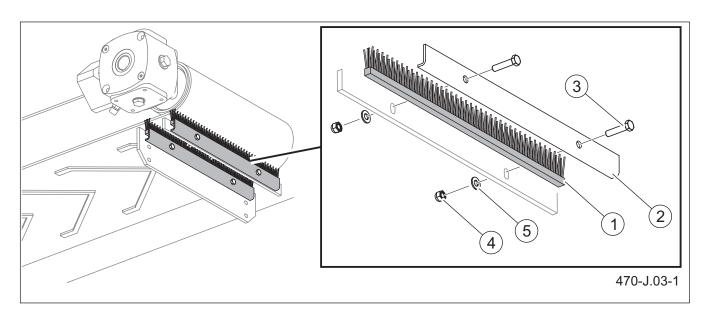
Replacement of conveyor belt brushes (1) brush (2) clamping strip
